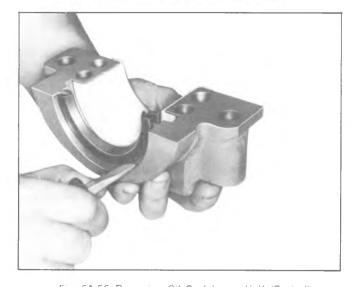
A-56--Removing Oil Seal Lower Half (Typical)
